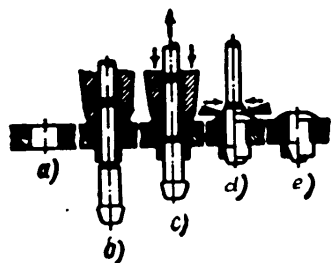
Outline of the Technical Riveting Process of Rivets with Mandrels
